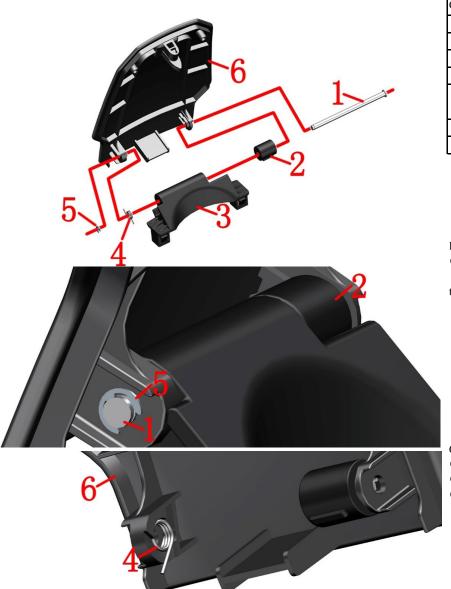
FUEL TANK COMPONENT		Oil tank outer cover assembly	CHK	(0)
